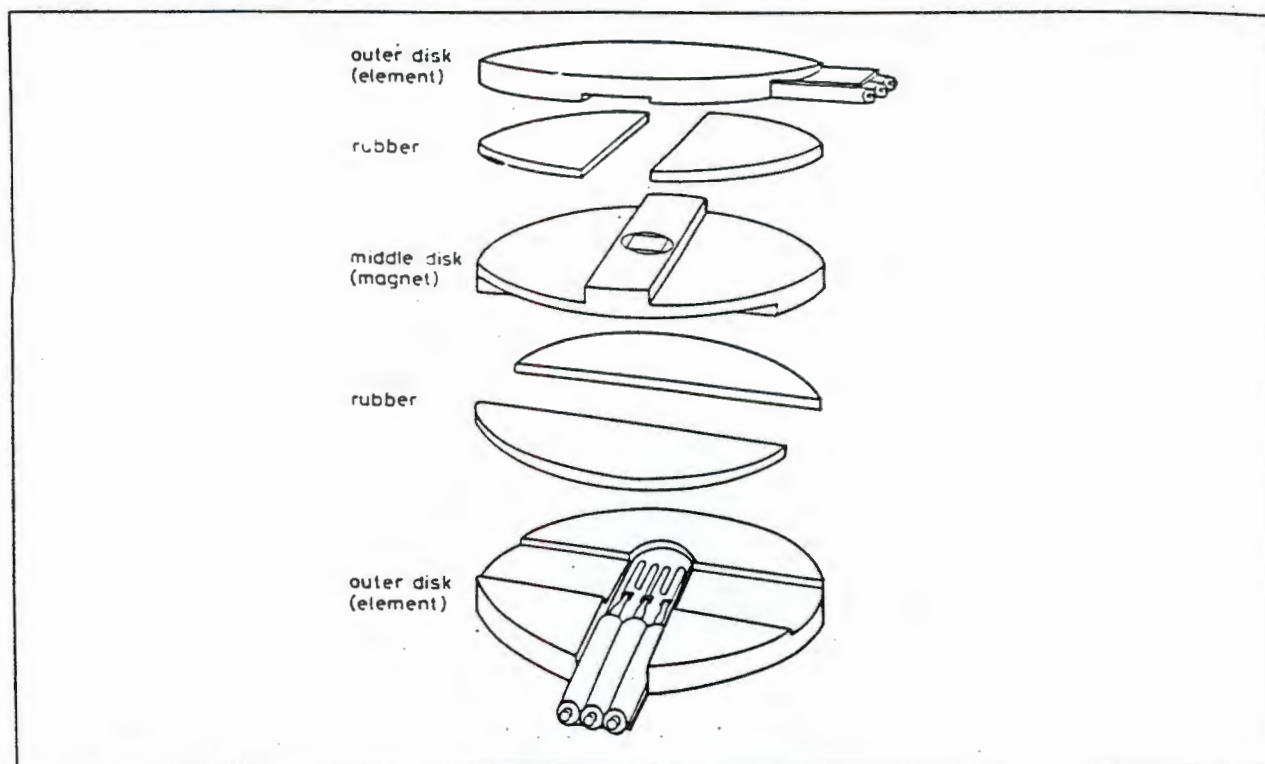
Exploded assembly of a biaxial shear transducer
